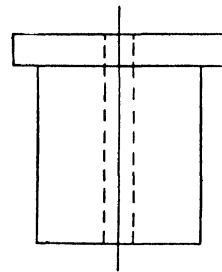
EXPANDER CAGE, BEFORE GROOVING IN BOX DRILLING JIG
